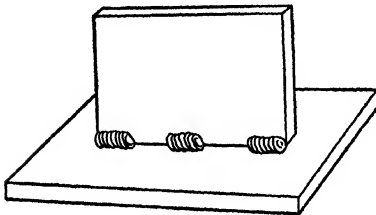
Skip welding to prevent distortion. Short beads are welded at intervals, and then the weld is completed by filling in short beads after the first ones have cooled.
